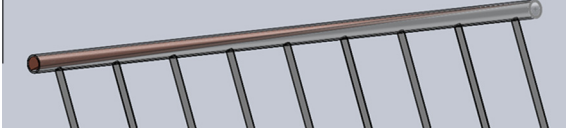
Top header (or bottom header) with modified internal shaped element.
